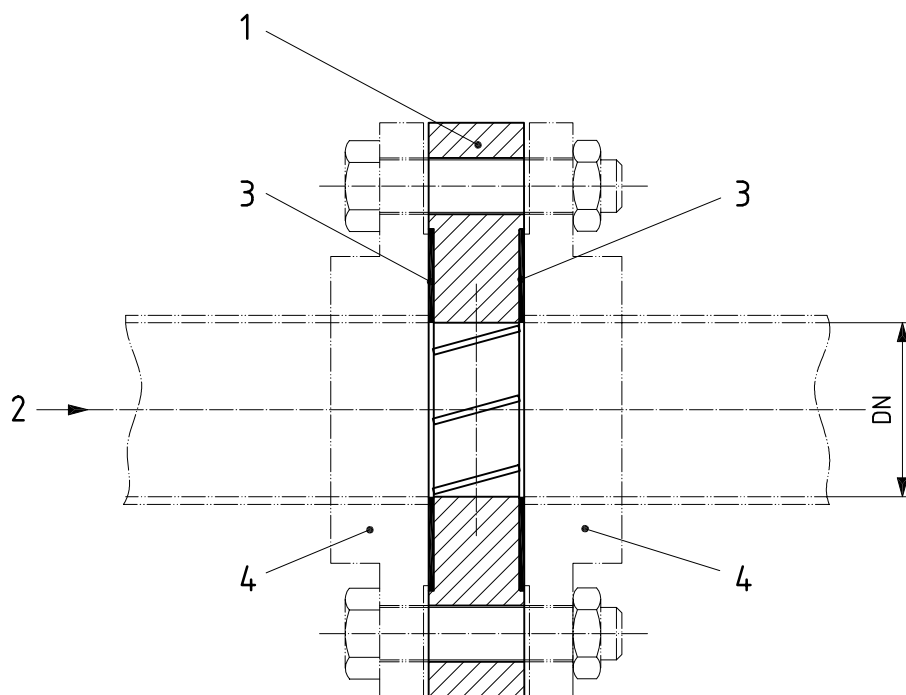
Gasket of a threaded type disturbance generator with dimensions as set out in Table B.5
